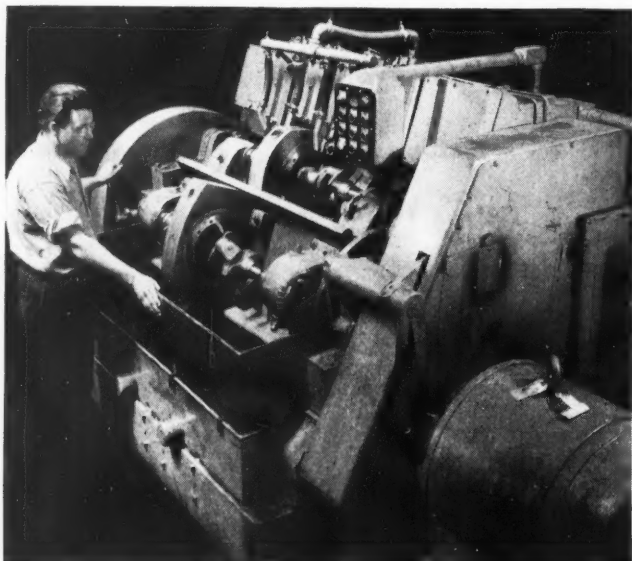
View of LeBlond DM Automatic Crankshaft Lathe designed especially for finish turning stub, flange, and intermediate line bearings on a six-cylinder automotive crankshaft.
